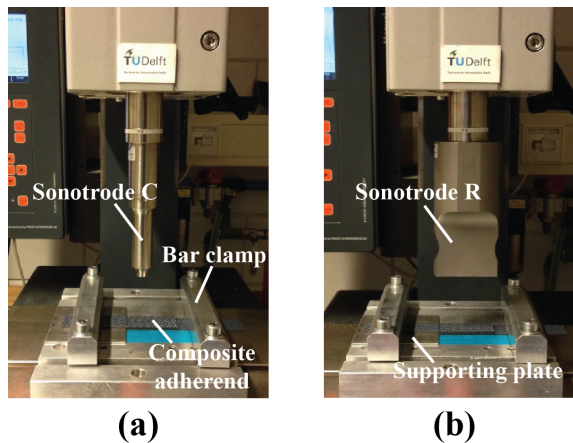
Ultrasonic welder including welding jig and (a) Sonotrode C (for sequential double-spot welding) and (b) Sonotrode R (for simultaneous double-spot welding).
